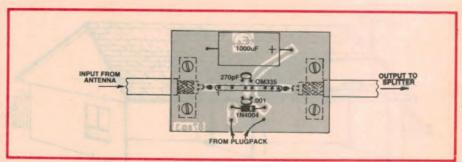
parts layout for the PCB. Note that the negative connections for C1, C2, C3 and the OM335 must be soldered to both sides of the PCB.
